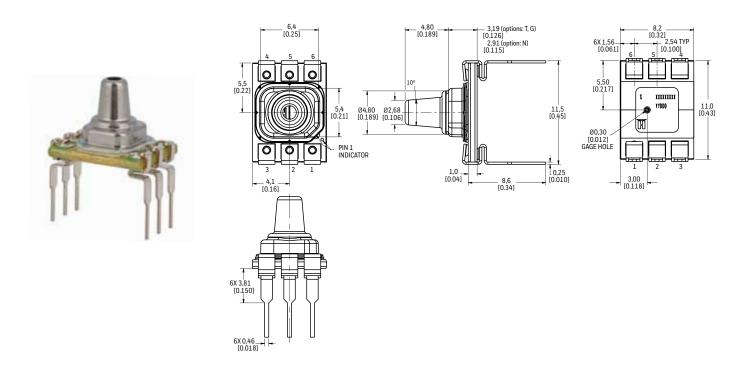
DIP PACKAGE DIMENSIONAL DRAWINGS (CONTINUED)
